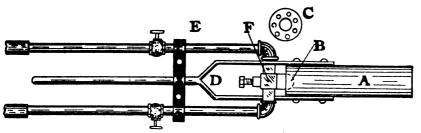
SHOWING DETAILS OF OIL BURNER FOR BRAZING
